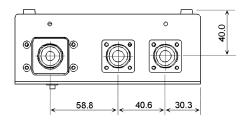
Main unit dimensions (side view, in millimeters, nominal)
